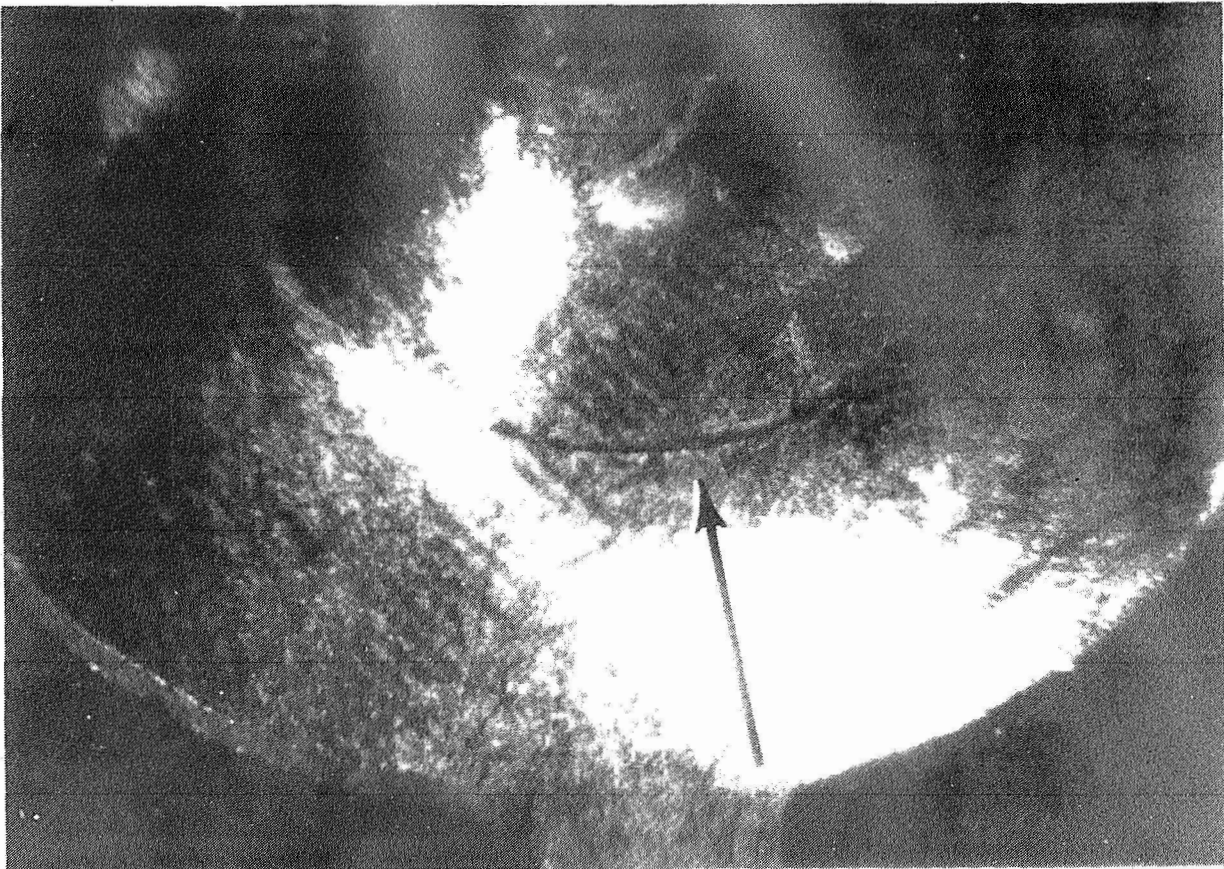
CRACKED SOLDER CONNECTION AFTER
